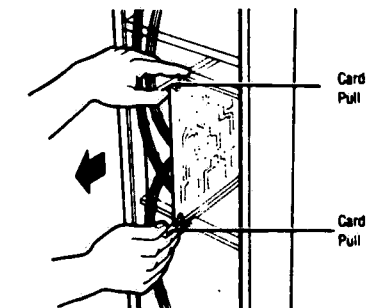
REMOVING A PRINTED CIRCUIT CARD.
